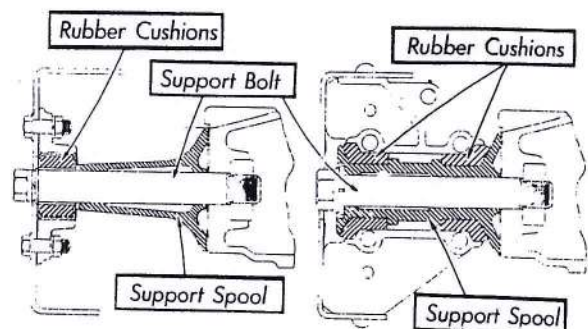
The 355 engine supports at the flywheel housing are different than on the 345.
